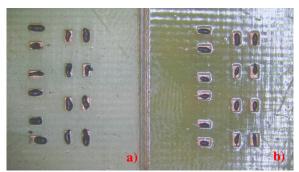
Deposited solder paste by (a) commercial dispenser, (b) prototype dispenser
